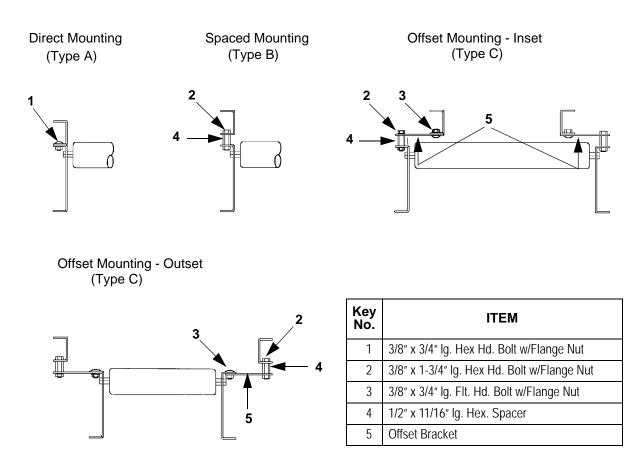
Fixed Side Guide Mounting Types, Identifying Fasteners
